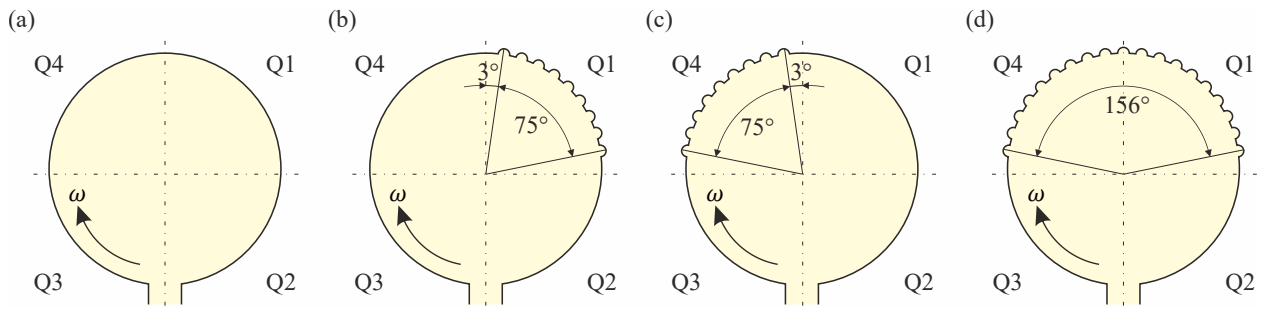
Experimental bearing layouts: a) plain bearing, b) layout Q1, c) layout Q4, d) layout Q14.
